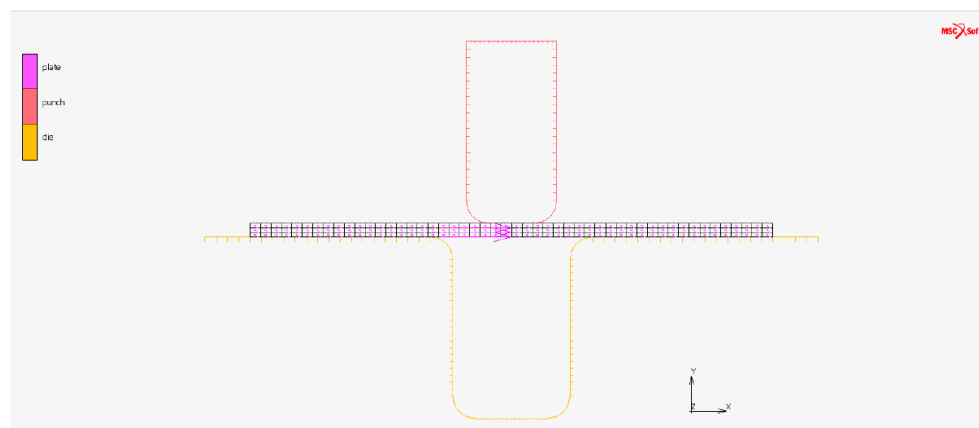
Schematic demonstrating the mechanics of Sheet Metal Bending [16]
